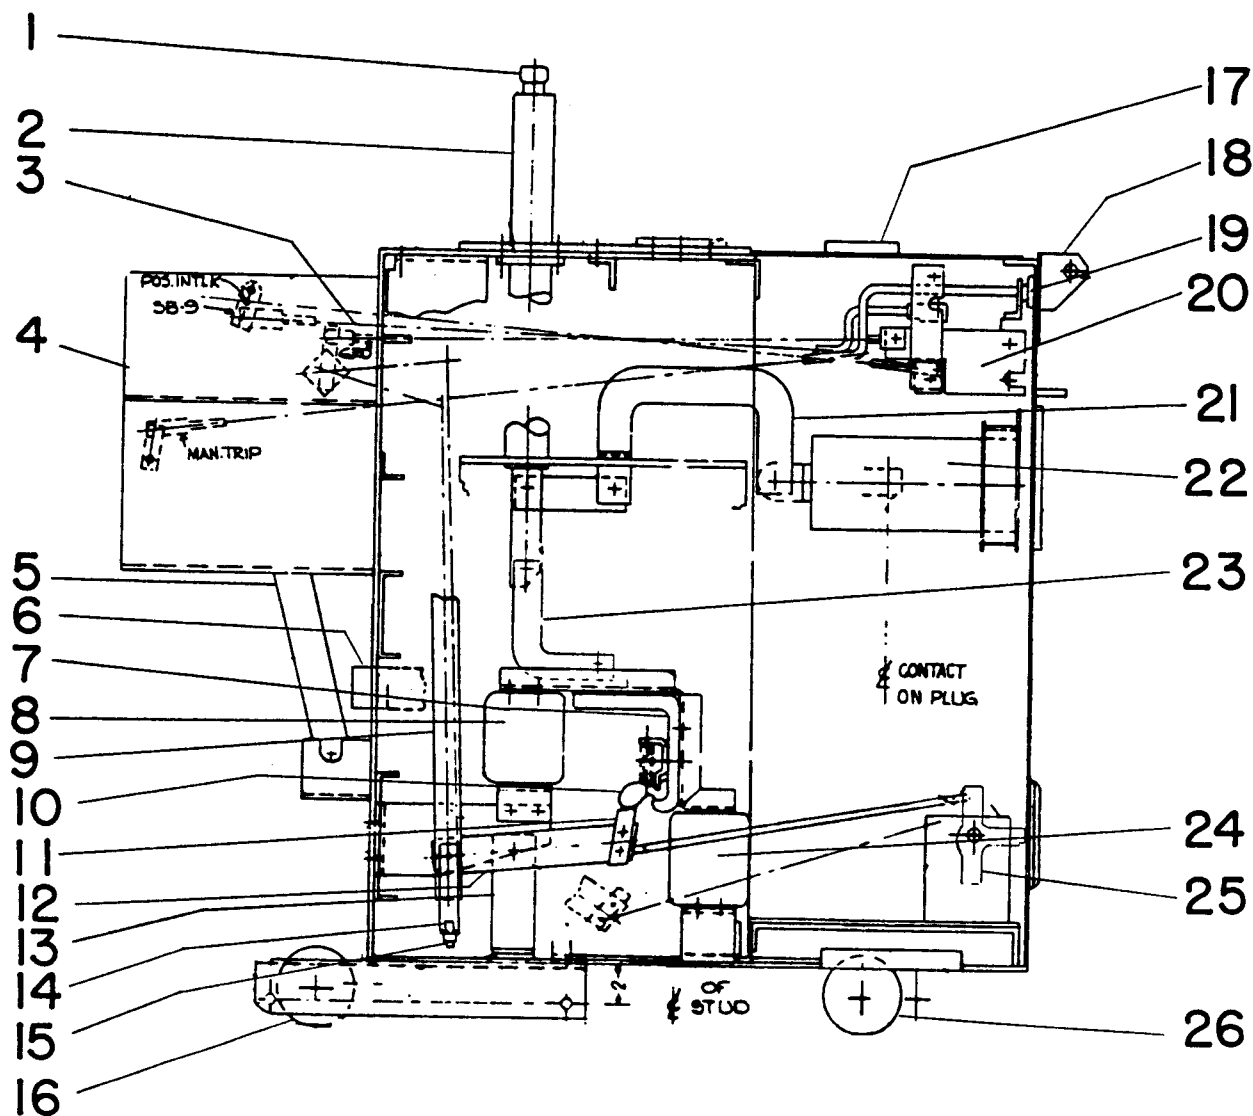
Cross-Section View of Ground and Test Device - Type 105
